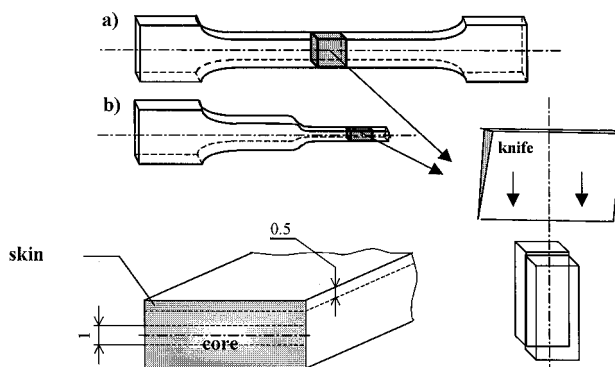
Sample preparation: a) injection-moulded specimen, b) drawn specimen.
